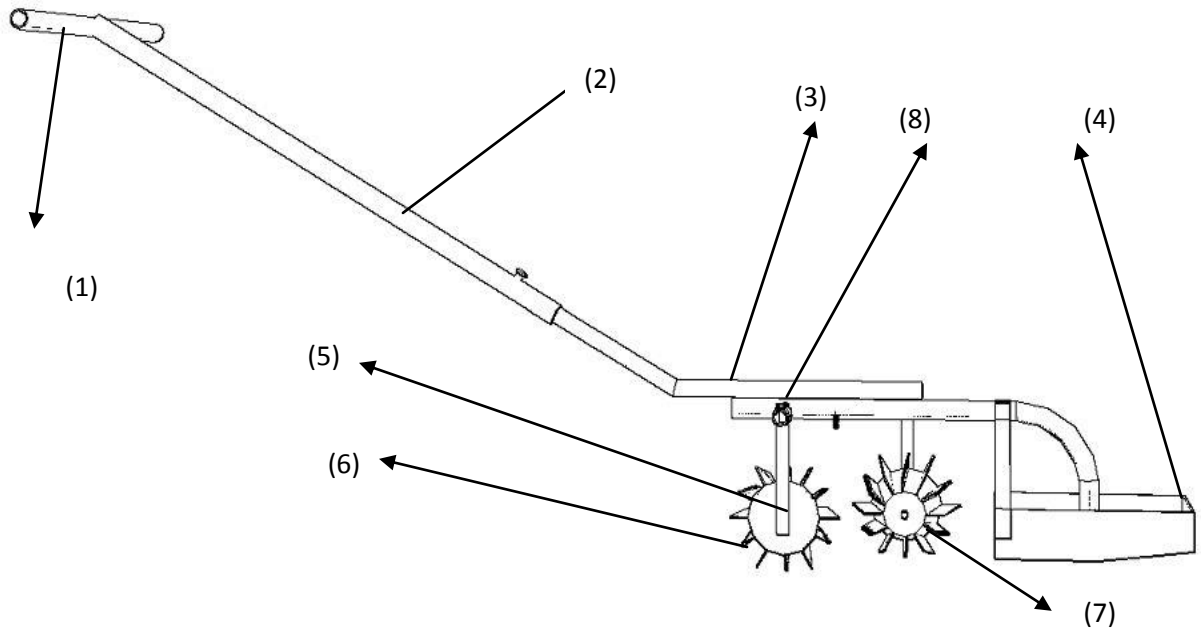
Schematic diagram of the developed weeder: 1. Handle; 2. Adjusting knob; 3. Main frame; 4. Float; 5. Cone brackets; 6. Blade; 7. Cone; 8. Width adjusting knob
